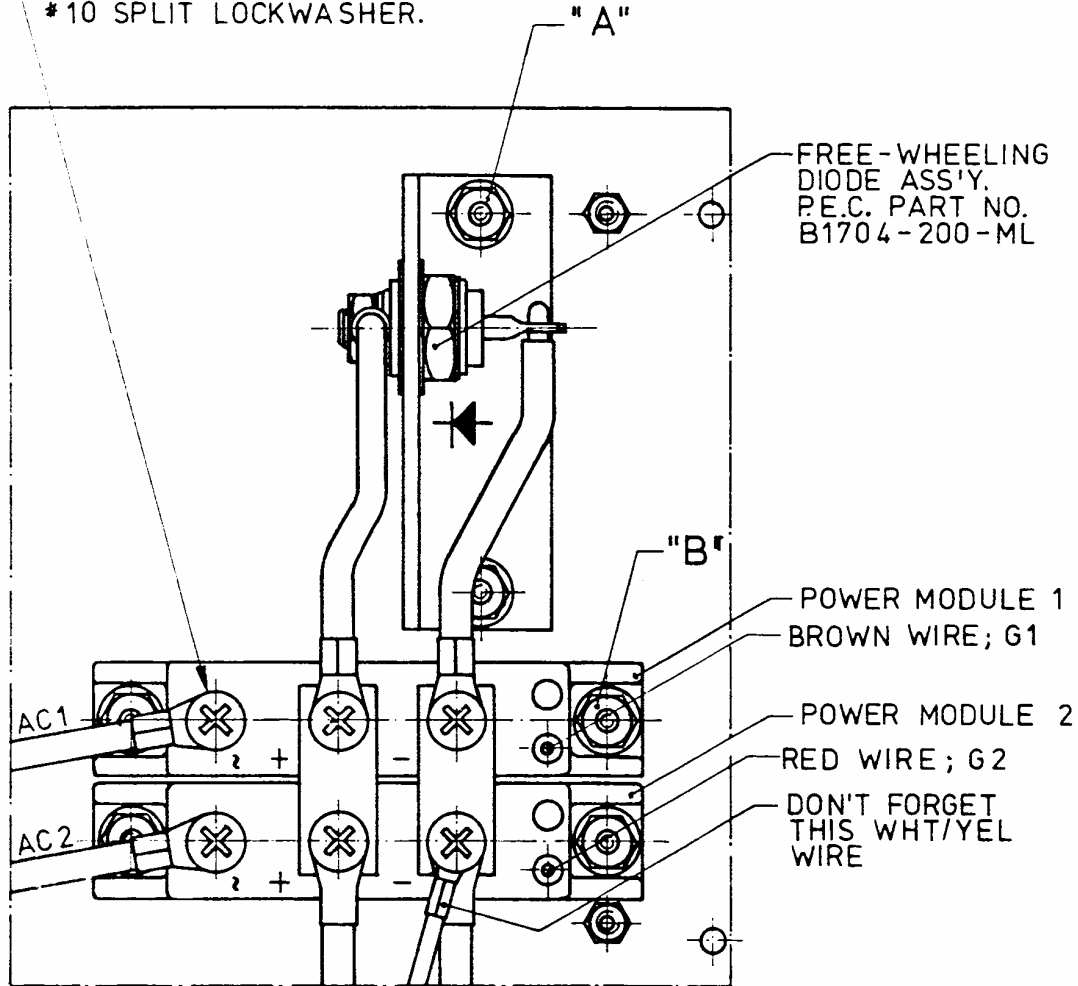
MOUNTING DETAILS FOR 5HP BRIDGE
